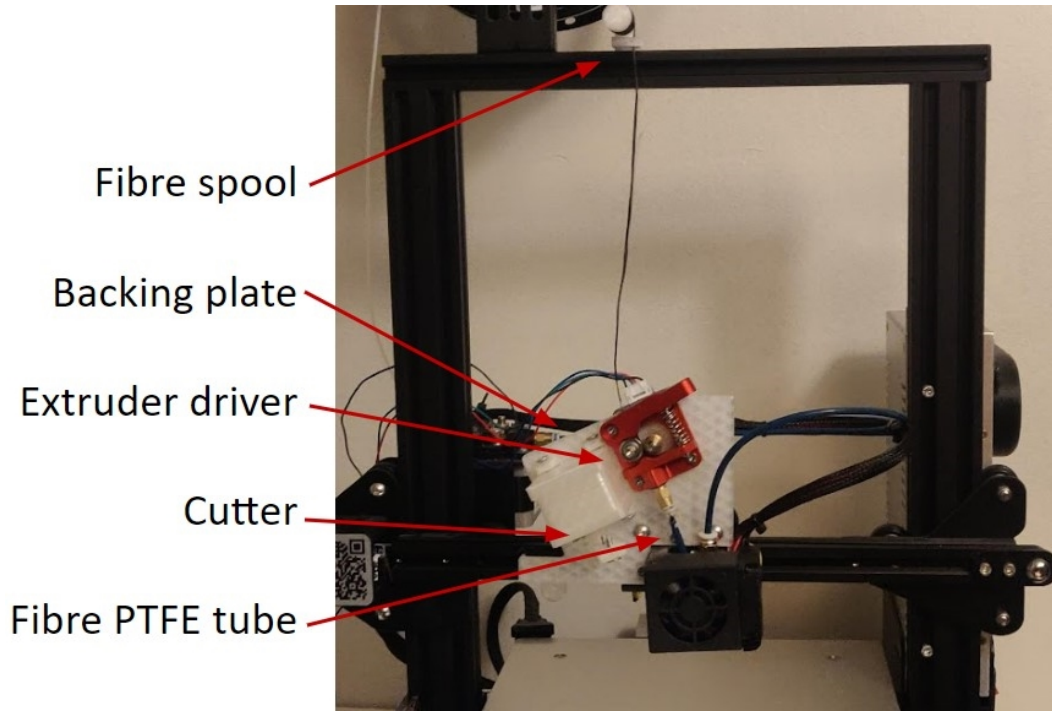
A fit test and overview of parts that will be presented as a mix of 3D printed parts together with real parts if they could be attained.
